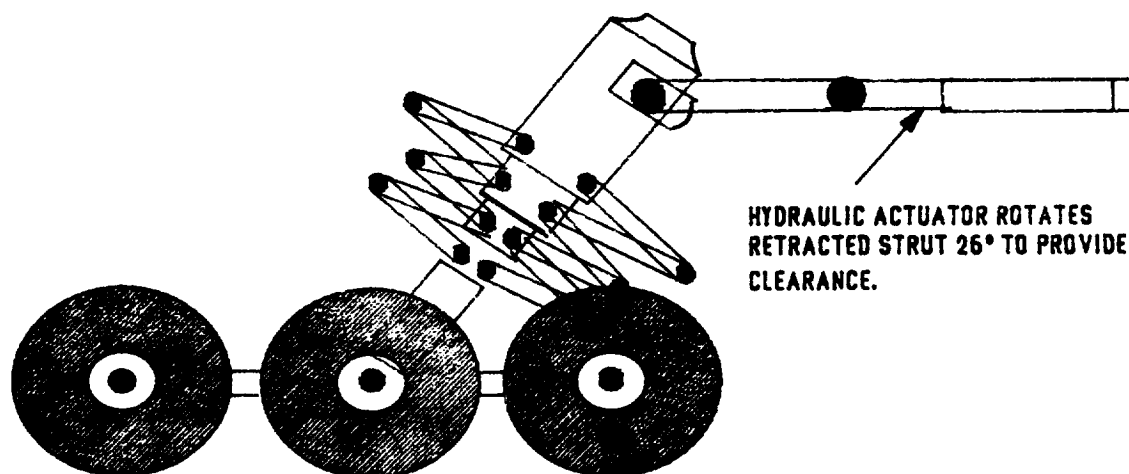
FUSELAGE GEAR STRUT LAYOUT.
